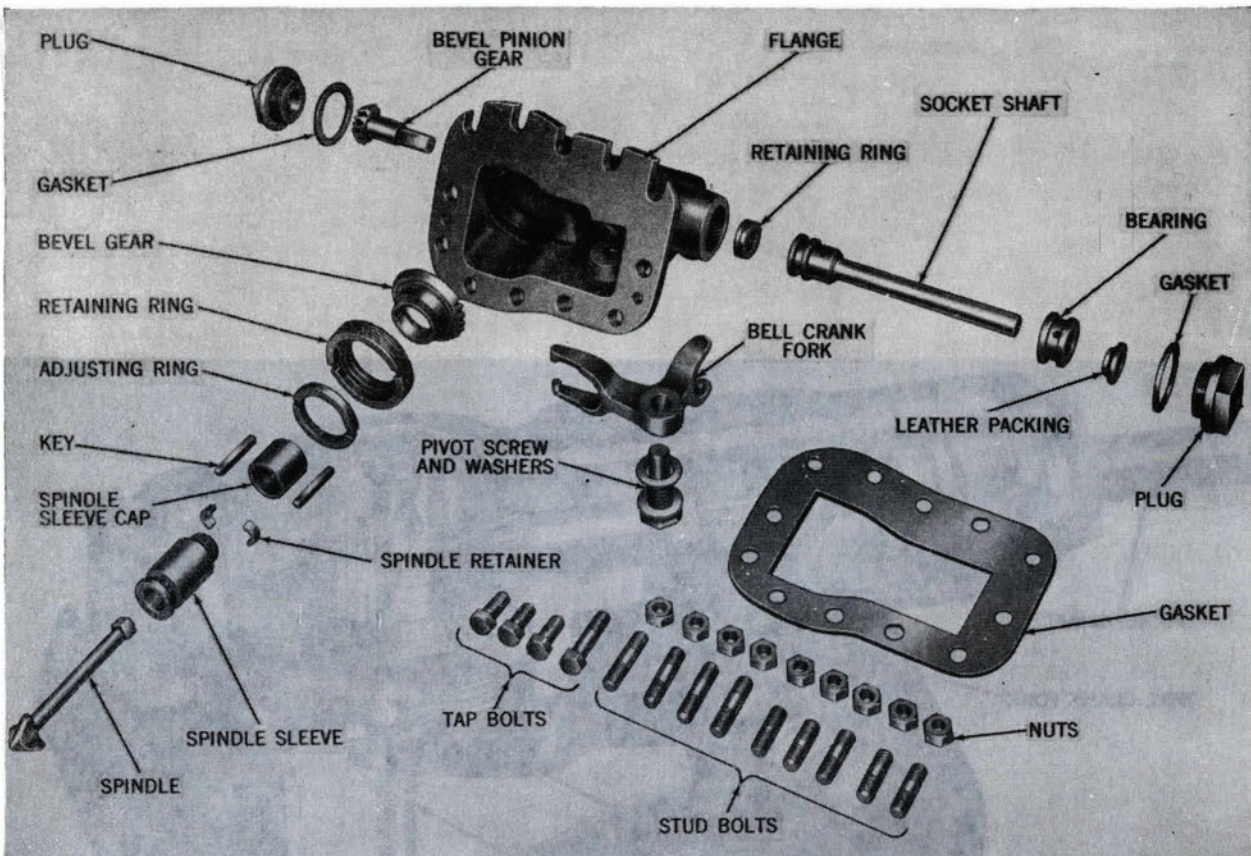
Simple Type Speed Setting Mechanism—Spindle Unit Disassembled.
